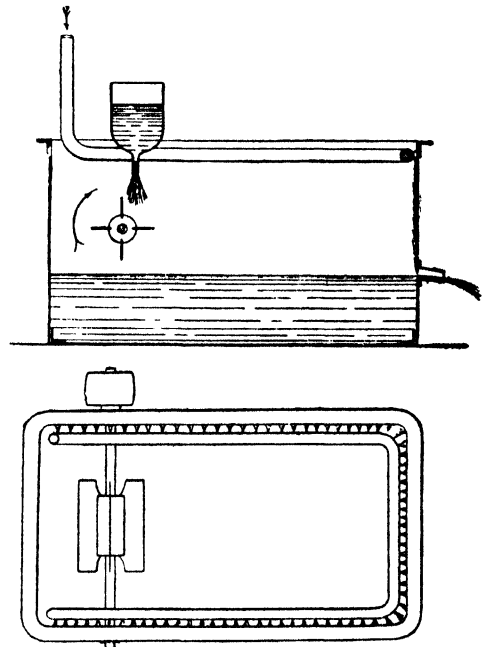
Early Mechanical Device for Pulverising Molten Metal.
